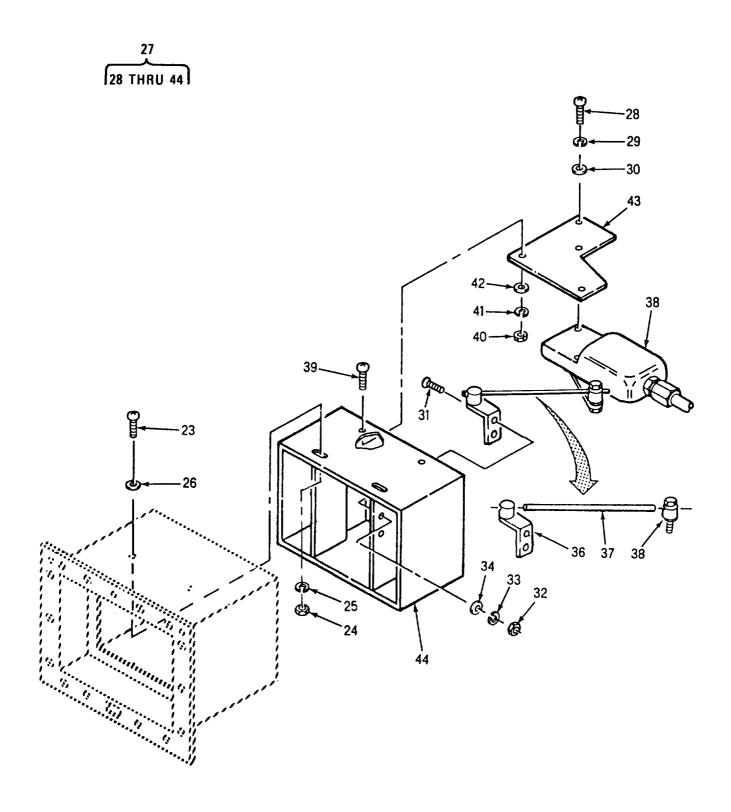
Purge Port Damper Motors (Sheet 2 of 2)
